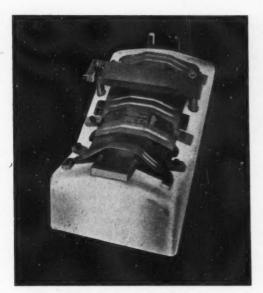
A Plastics Fixture Used to Hold Tailflap Assemblies During a Tack-welding Operation
